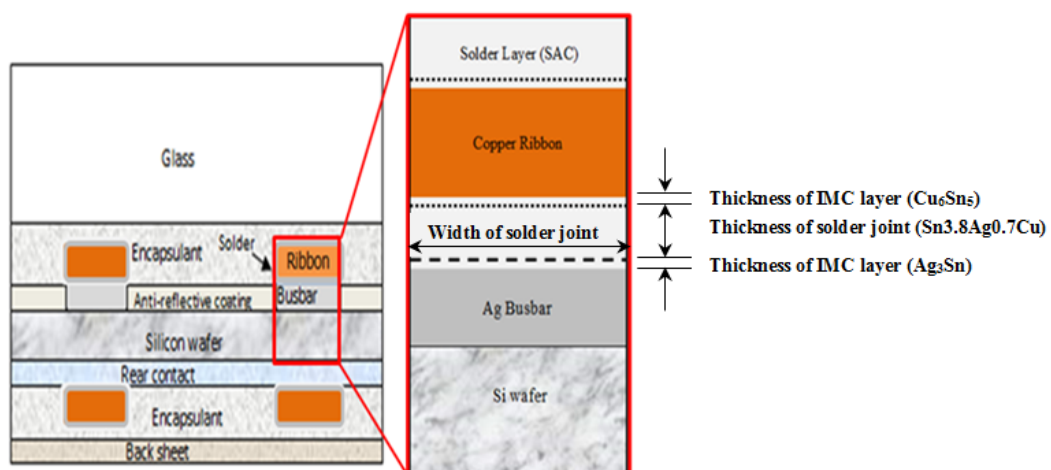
Schematic of cross-section of typical crystalline Si solar cell assembly showing IMC thickness, solder joint thickness and width
